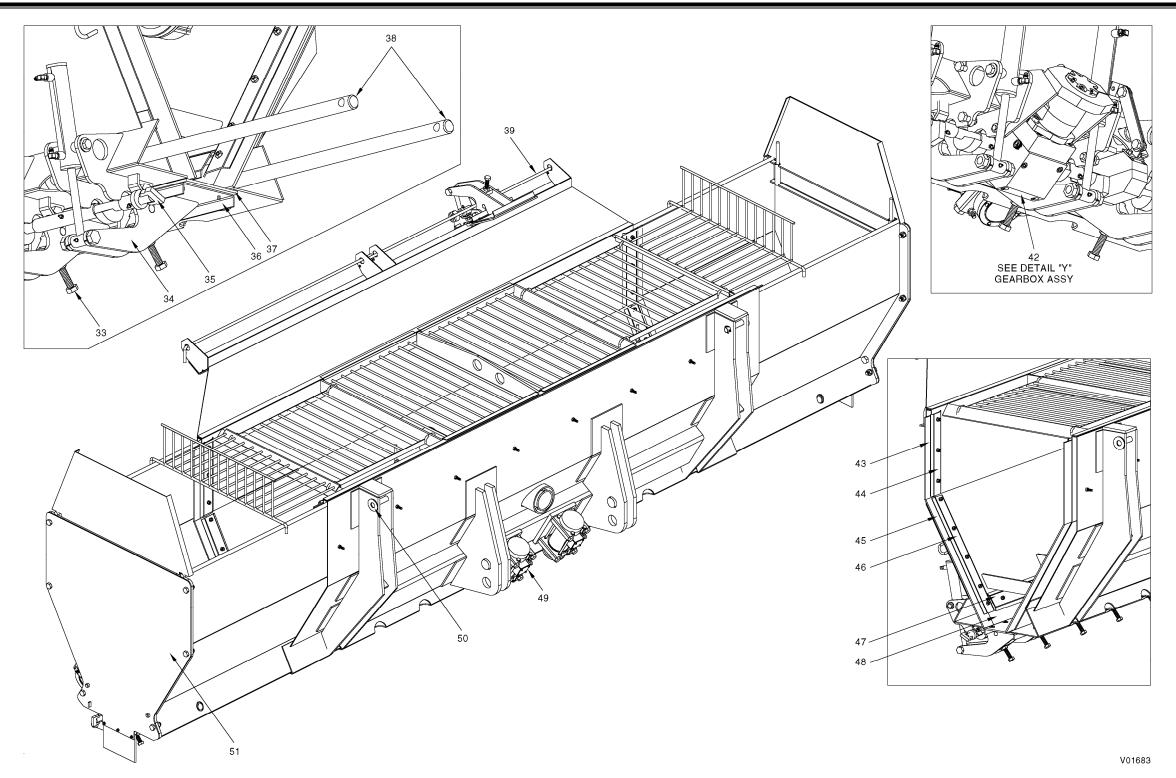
(Sheet 2). Chip Box 6 in. Mouth
